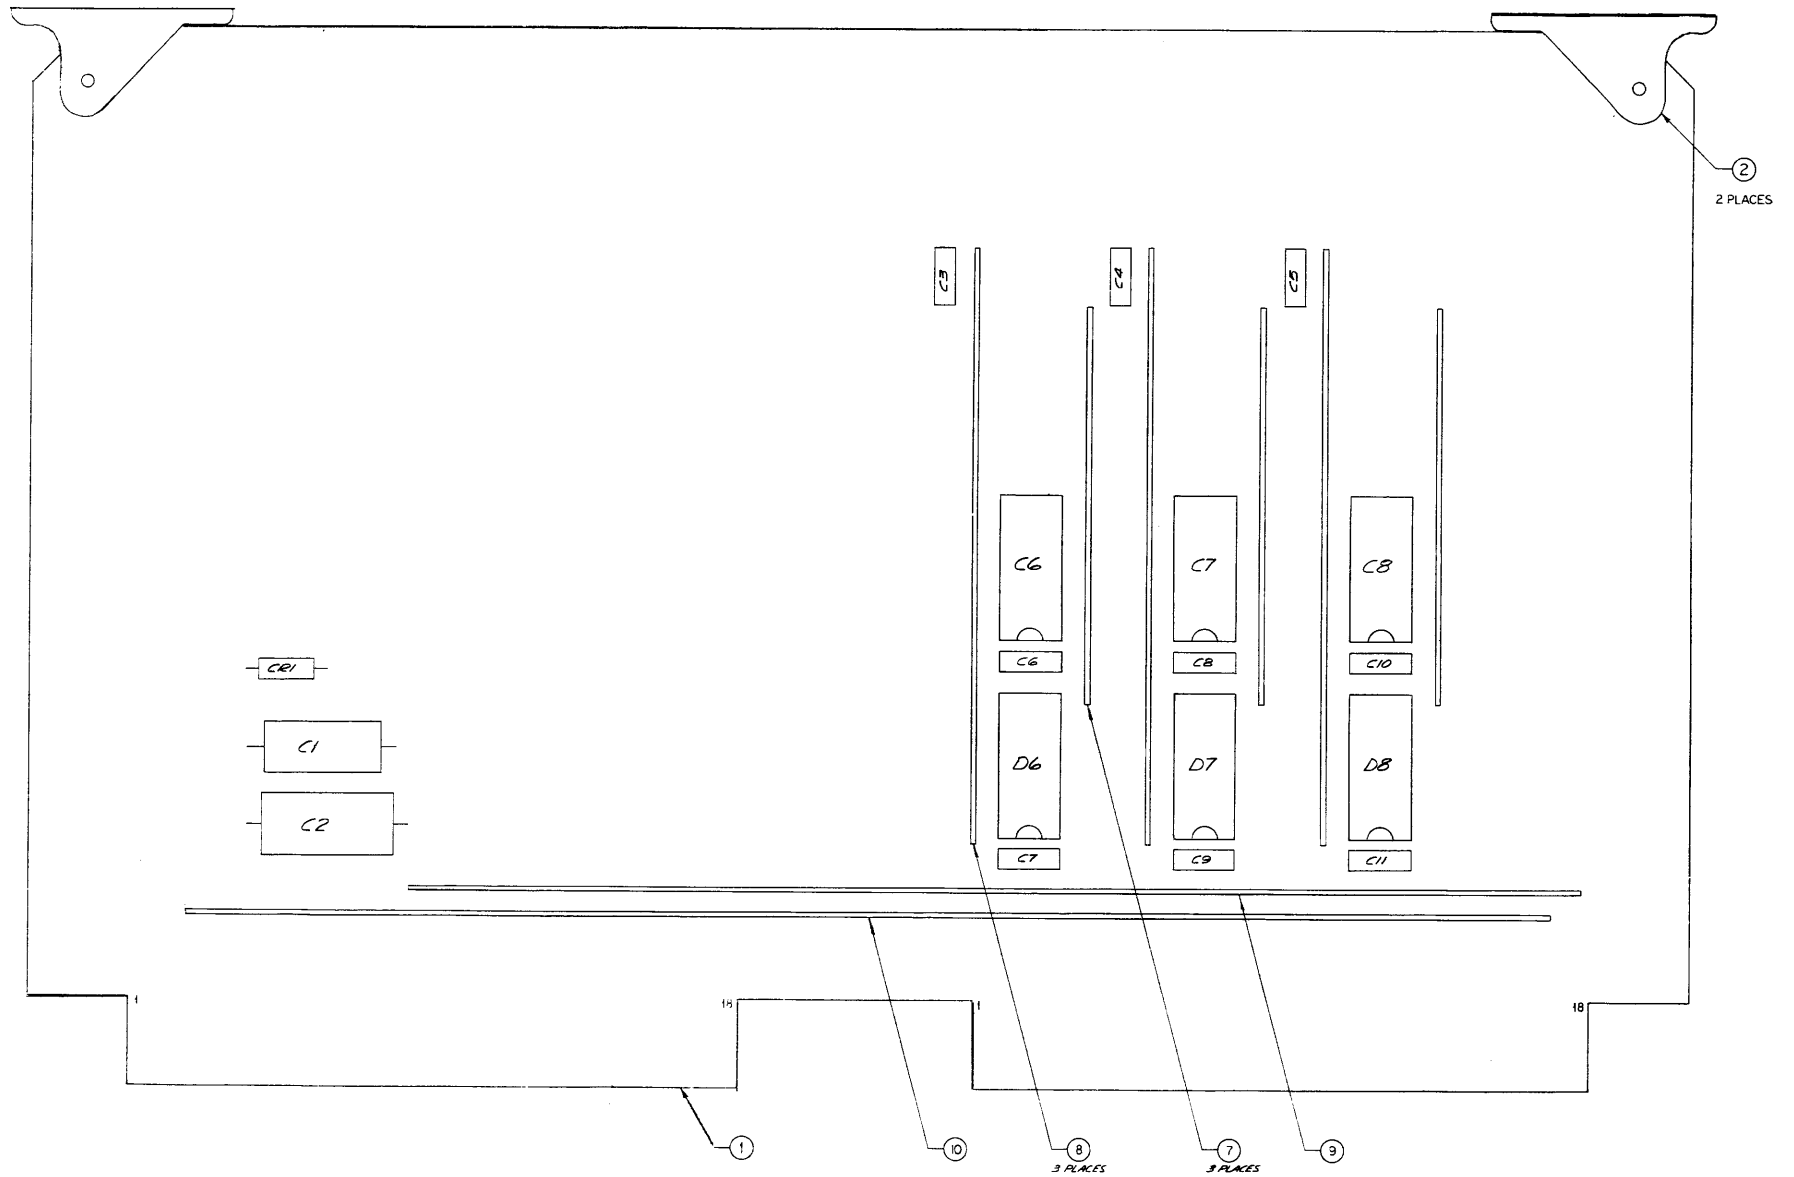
Assembly Diagram, Driver Card (Model 2893A)
